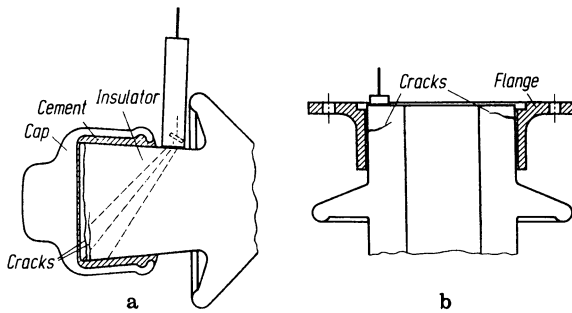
Testing for cracks under the cap. a On solid-core insulators; b on hollow insulators
